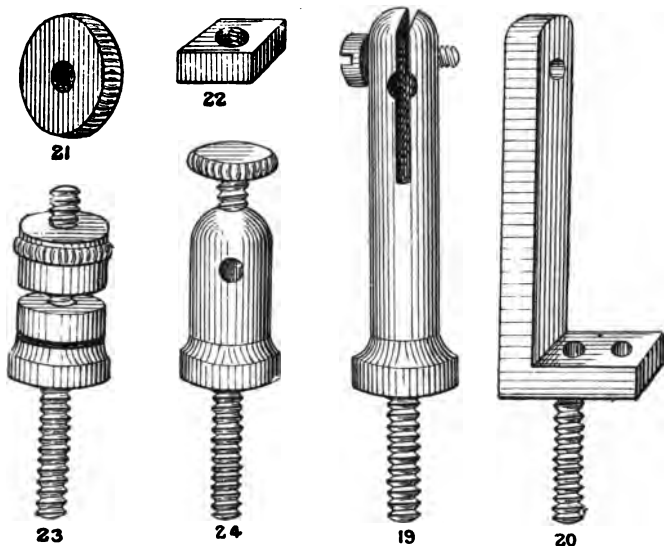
Break Pillar. FIG. 20.—Bracket Pillar for Break. FIG. 21.—Lock Nut. FIG. 22.—Small Brass Nut. FIG. 23.—Binding Screw, Telegraph Pattern. FIG. 24.—Pillar Binding Screw.
